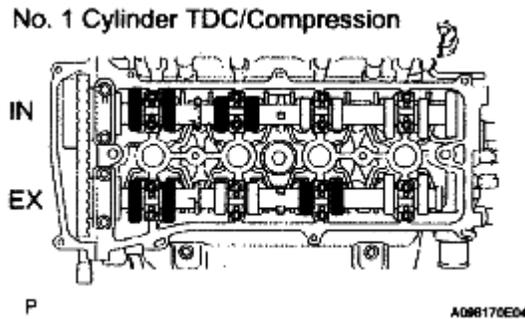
Measuring Clearance Between Valve Lifter And Camshaft
